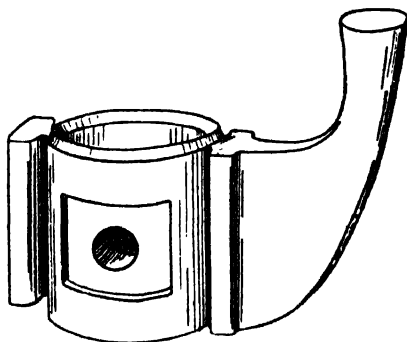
Piston casting fed from a distributed gate and shrink pad.
